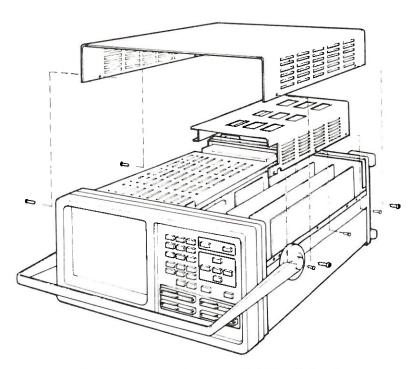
Disassembling the 1230 mainframe to install 1230E1 Expander Cards.
